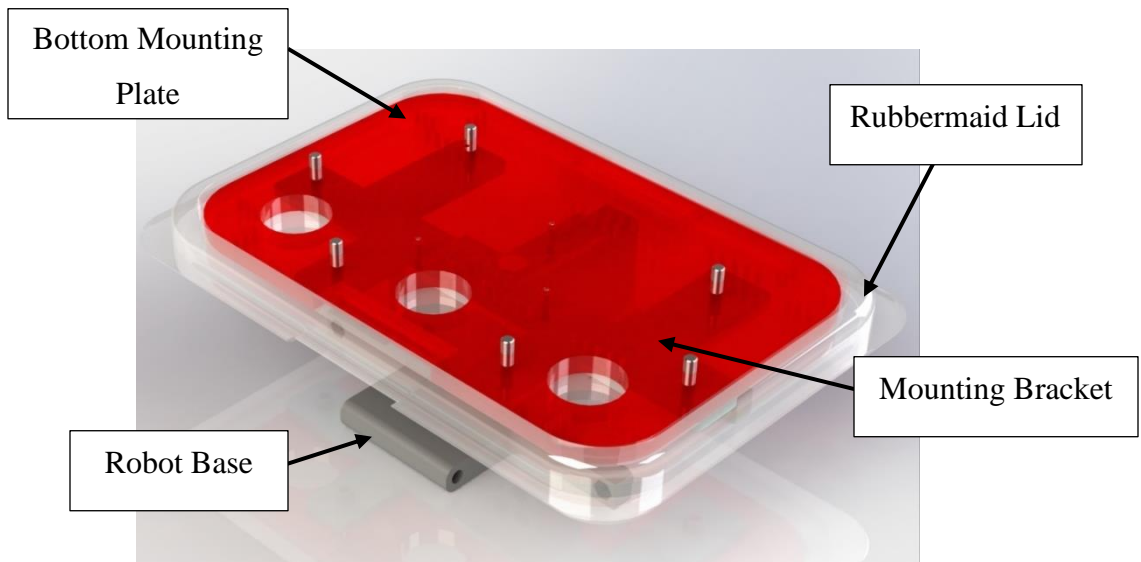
Interfacing between Spire Bottom Plate and Mounting Bracket
